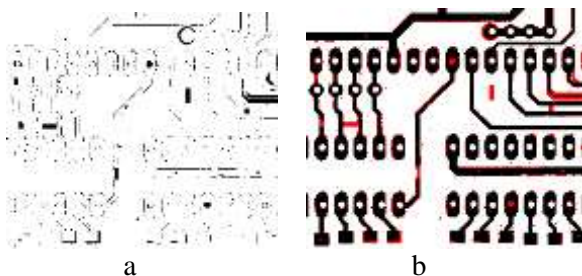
Difference between two PCB images: defects and inaccuracies (a), objects, defects, and inaccuracies (b)
